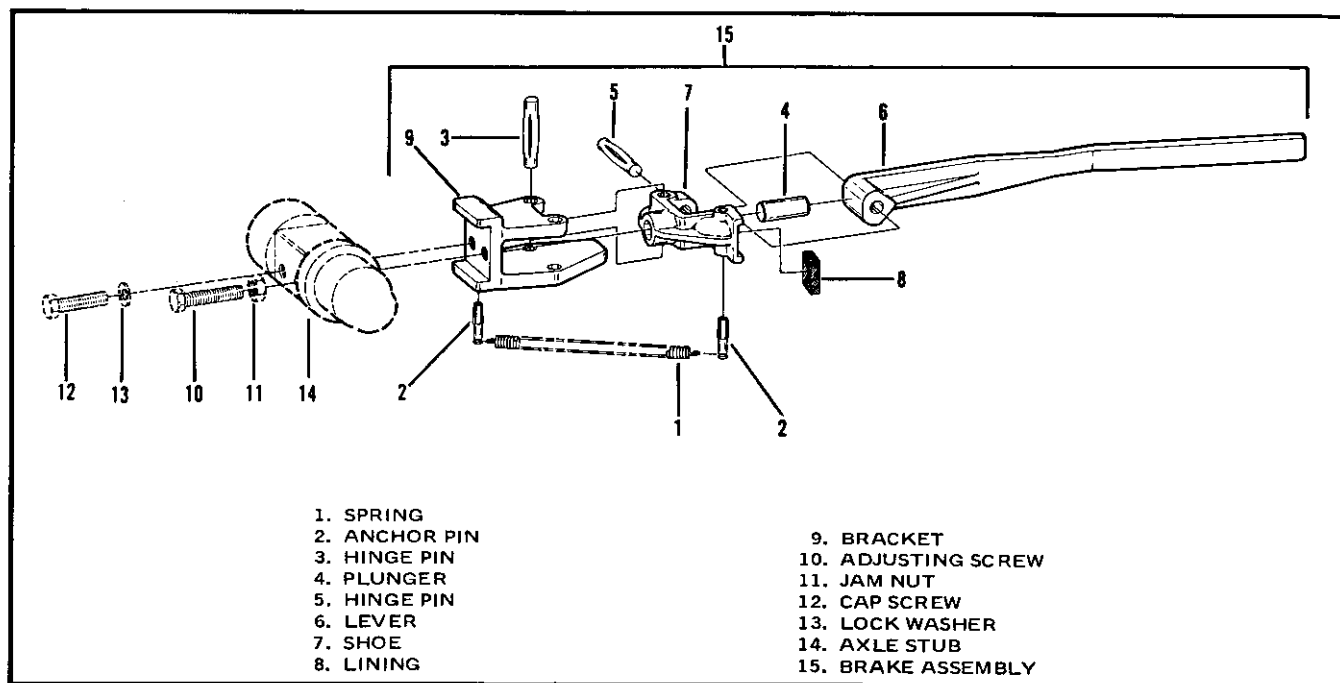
Hand Brake Lining - Disassembly and Assembly
